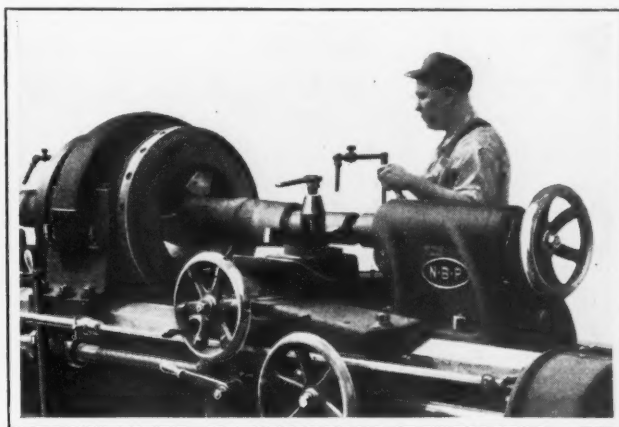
Niles Axle Lathe Equipped with Equalizing Driving Head
